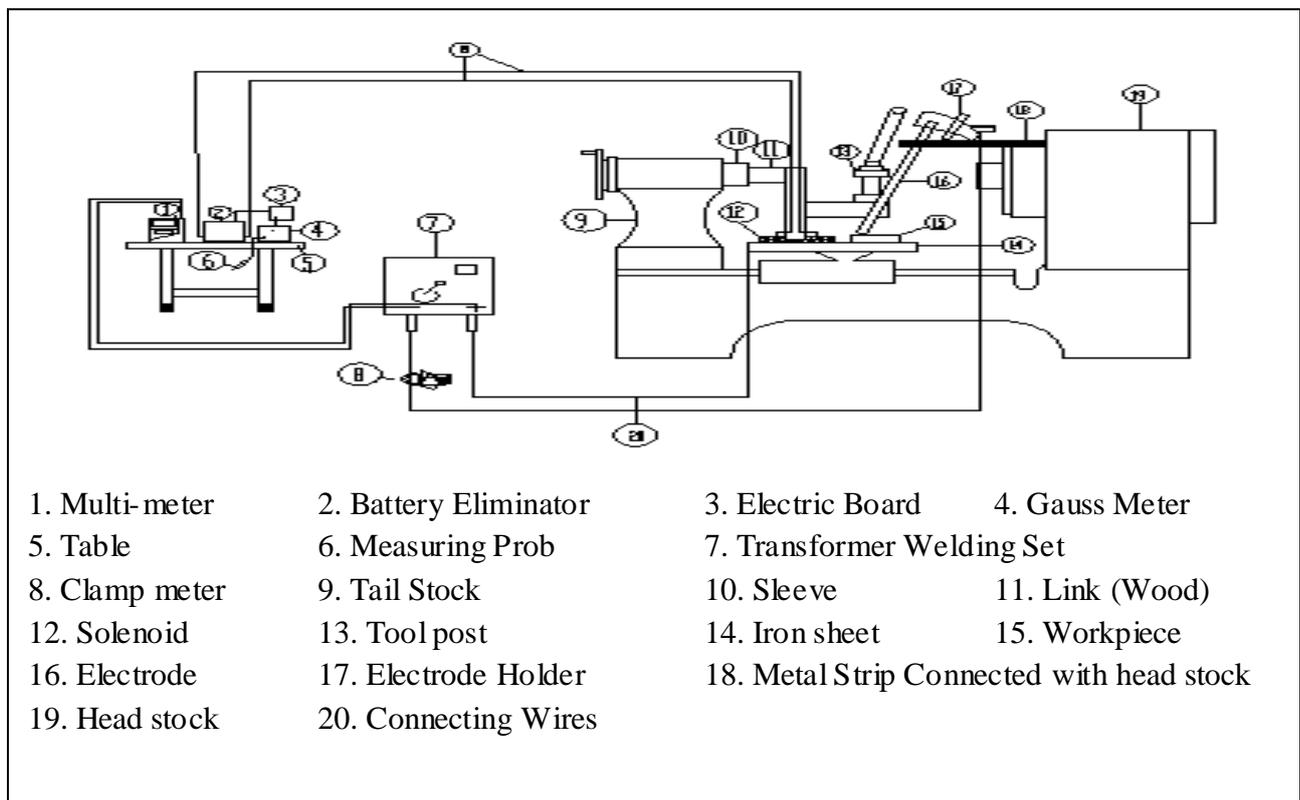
Welding Set-up (Line Diagram)
